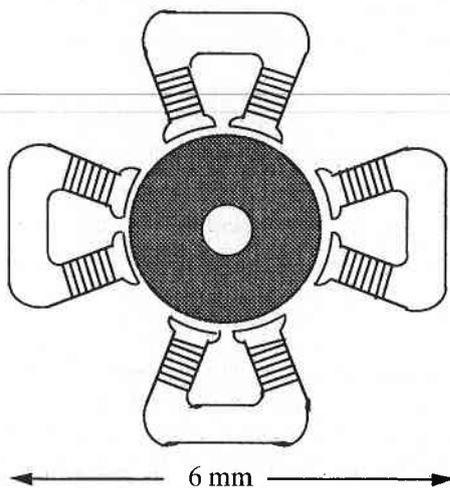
Layout of rotor and stator. The rotor diameter is 3 mm.
